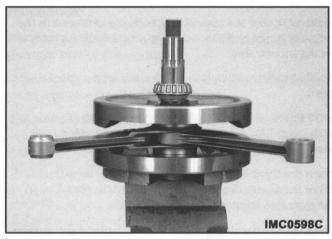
Flywheel and crank assembly mounted in rebuilding jig
